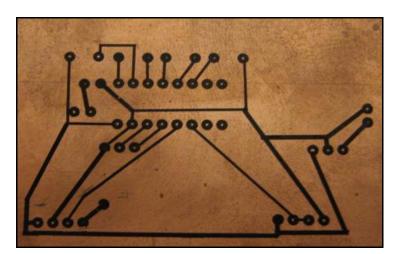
Do lettering in bare board (device for receiving or transmitting from/to PC part)
